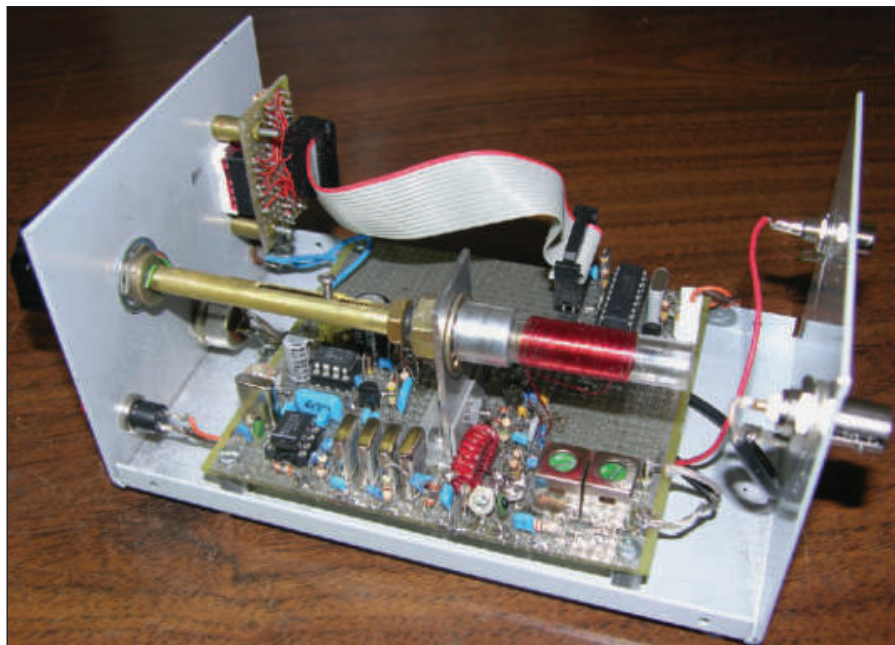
Inside of 75 meter receiver showing assembly locations.
